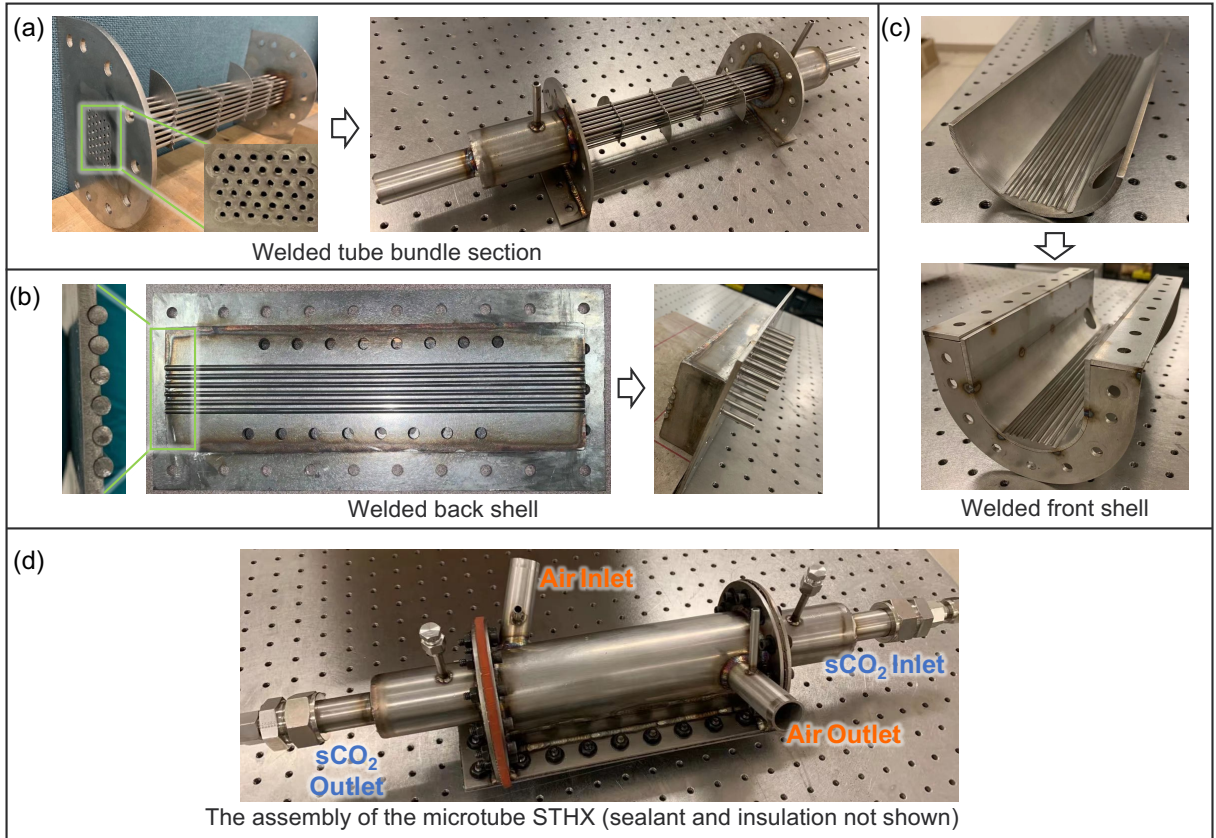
Process flowchart for fabricating (a) the tube bundle section, (b) the back shell, (c) the front shell, and (d) assembling the MT-STHX.
